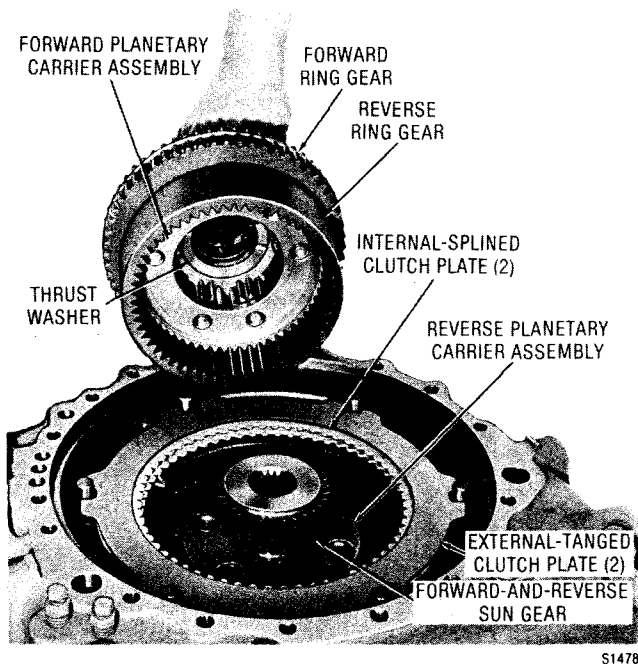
Installing forward planetary carrier assembly and attached parts (TRT-3)
